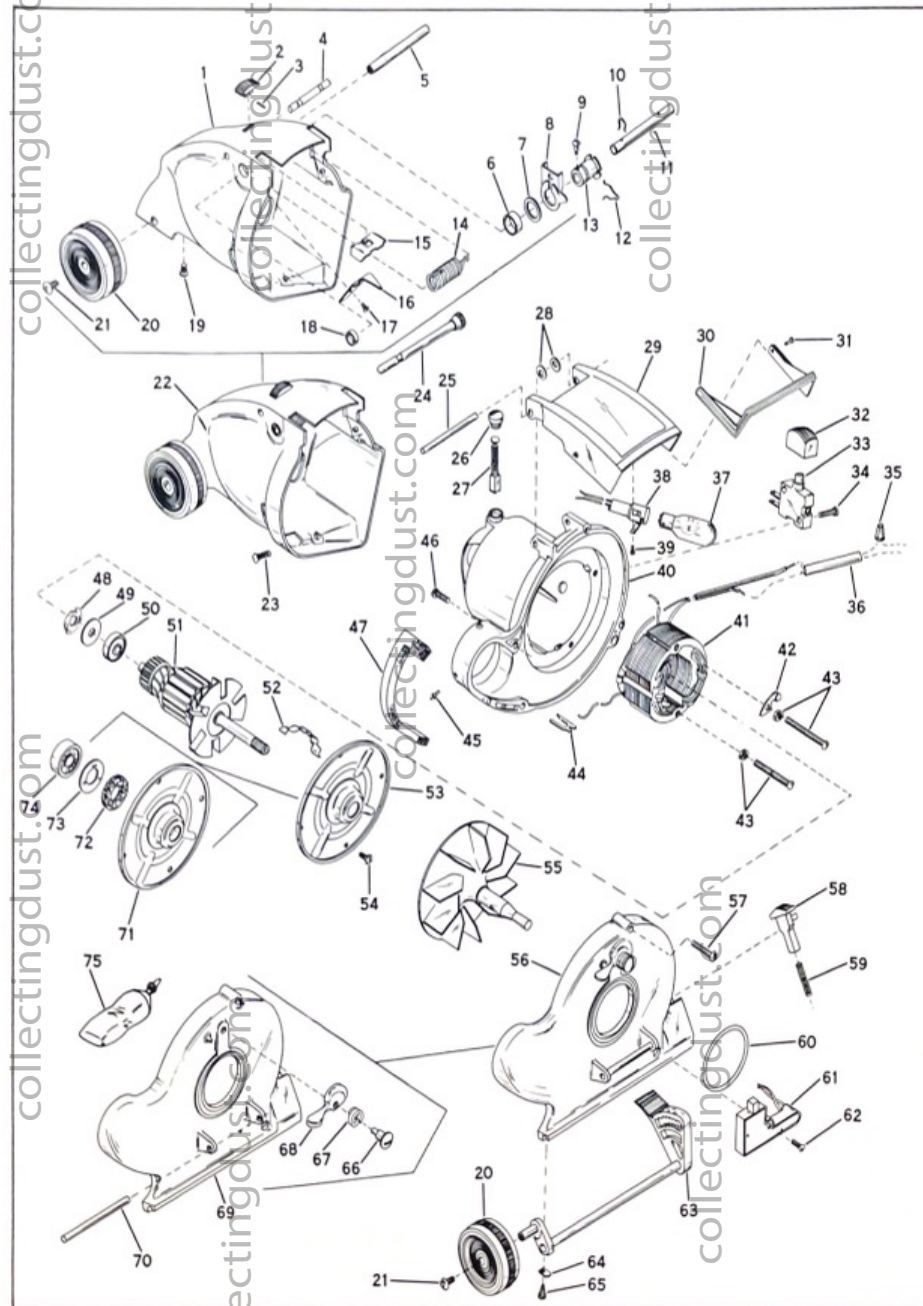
Motor group, exploded view. (Model 516 through 518)
